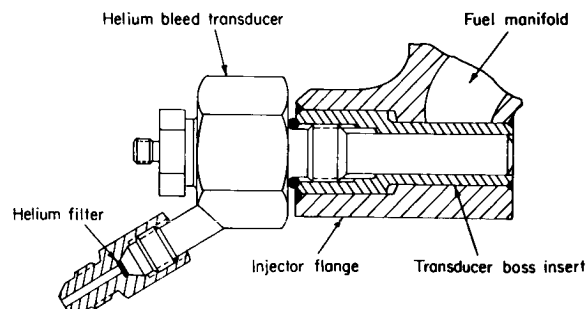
Typical transducer mounting through injector flange.
